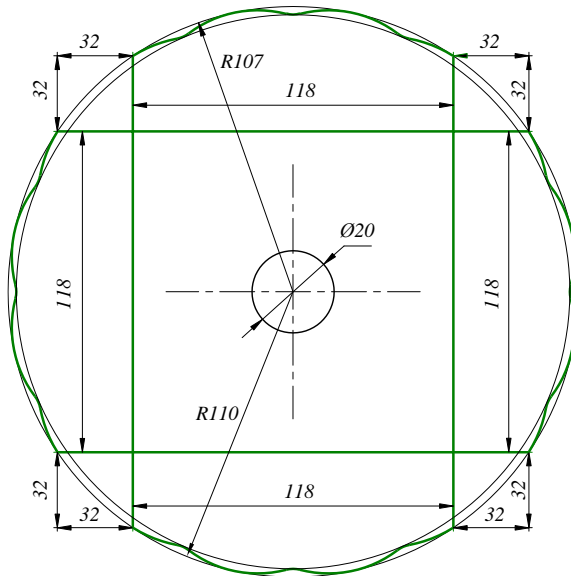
Scheme for manufacturing knives with two waves on the blade
